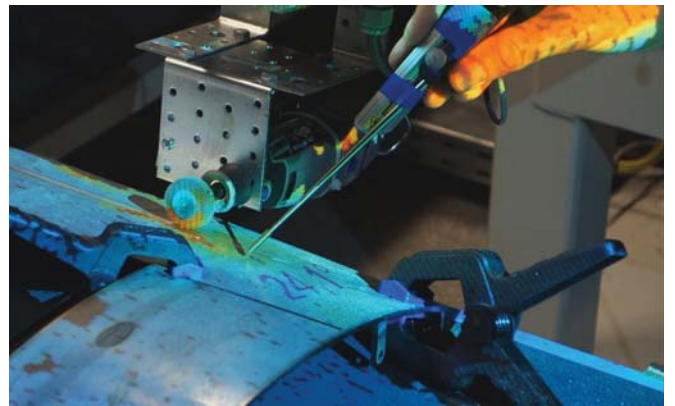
Measurement of surface temperature of the metal workpiece shortly after processing, using a tracked probe to specify the measurement point.
